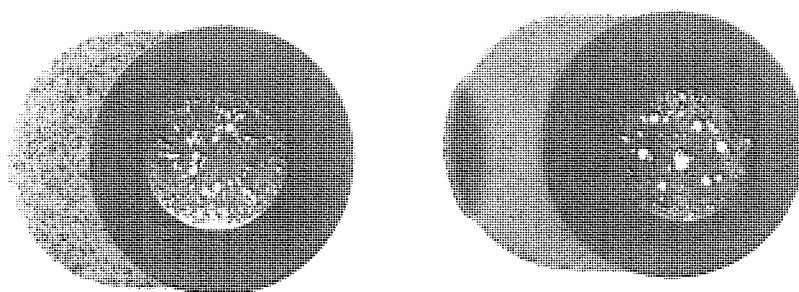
Photograph showing castings from a TtertBCS treated mould(right)
